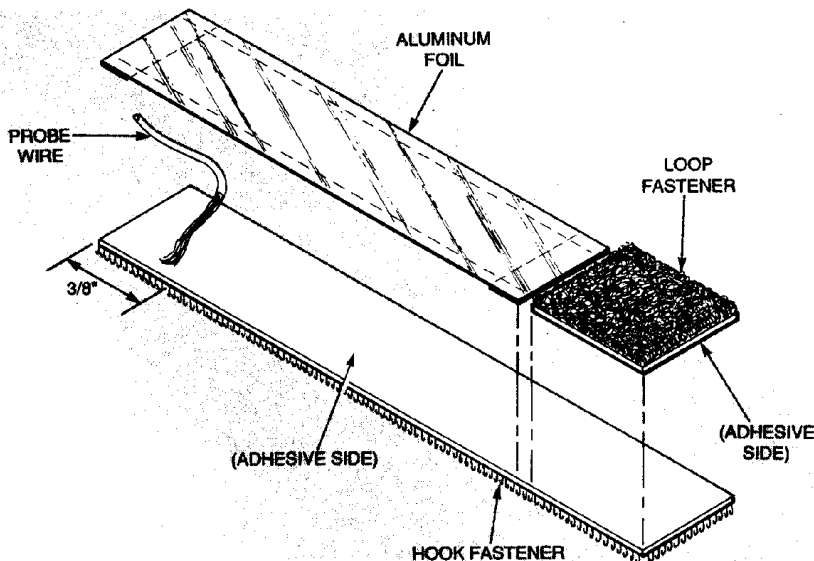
Self-adhesive Velcro-style hook-and-loop fasteners make assembly of the skin probes very simple. You could substitute a single layer of heavy-duty aluminum foil for the 2 layers of regular aluminum foil for the contact itself. With either type of foil, be sure to fold over the edges for added resistance to wear and tear on the probes.
